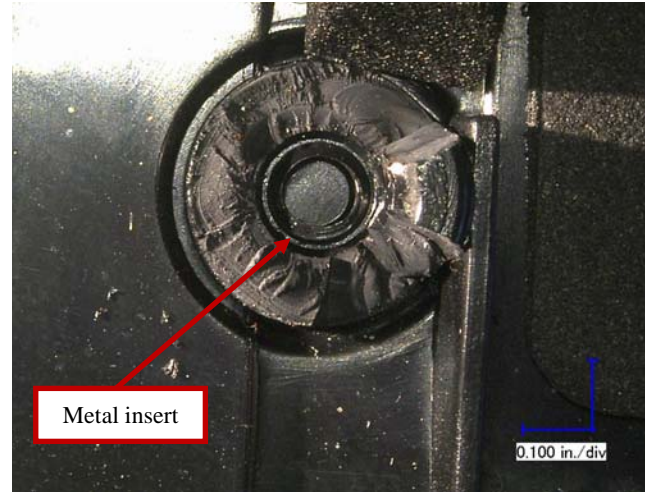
The fracture surface of the housing insert boss is shown exhibiting brittle fracture features, without apparent macro ductility.
